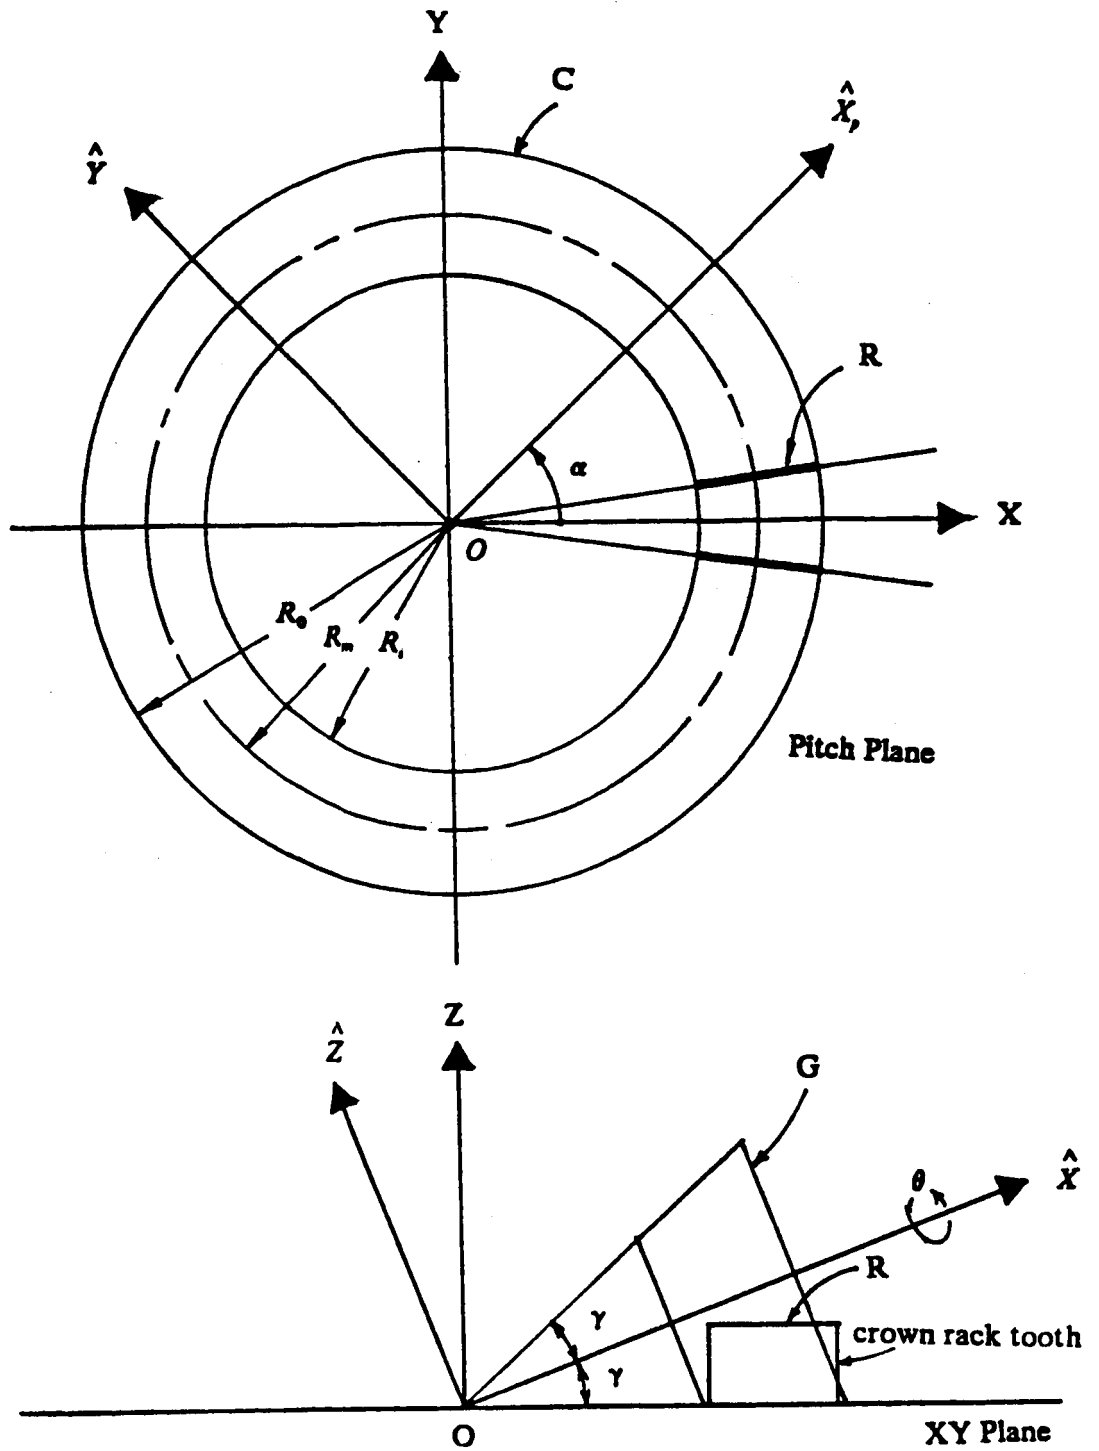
Straight Bevel Gear Tooth Surface Generation
